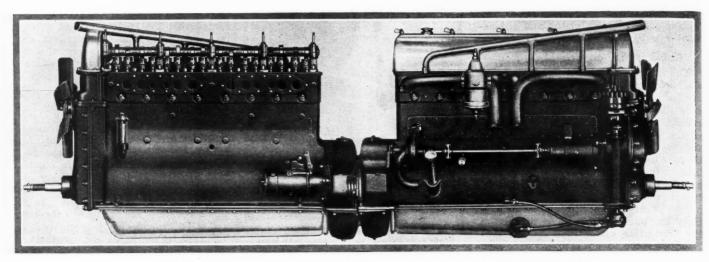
(left). Left side of Stutz engine showing general overhead arrangement and porting. Fig. 13 (right). Right side of engine with valve housing cover in place.
